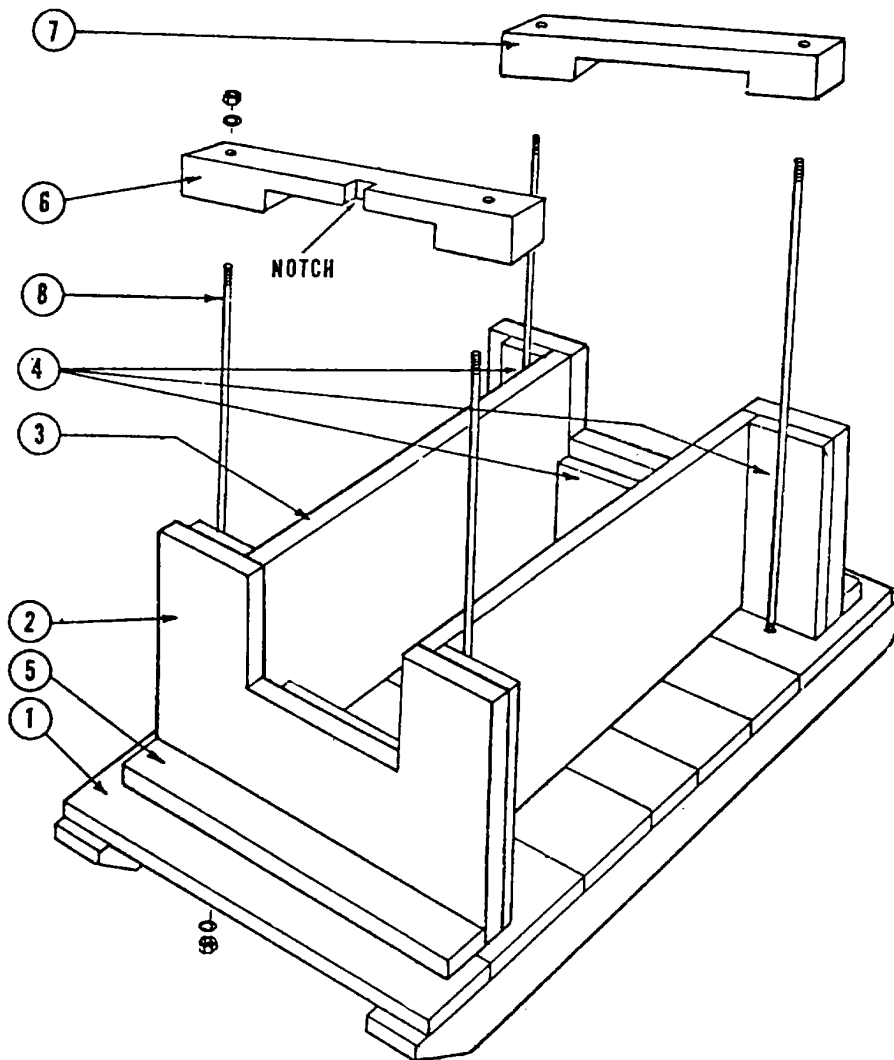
Blocking, Bracing, and Anchoring with Tie Down Rods.
